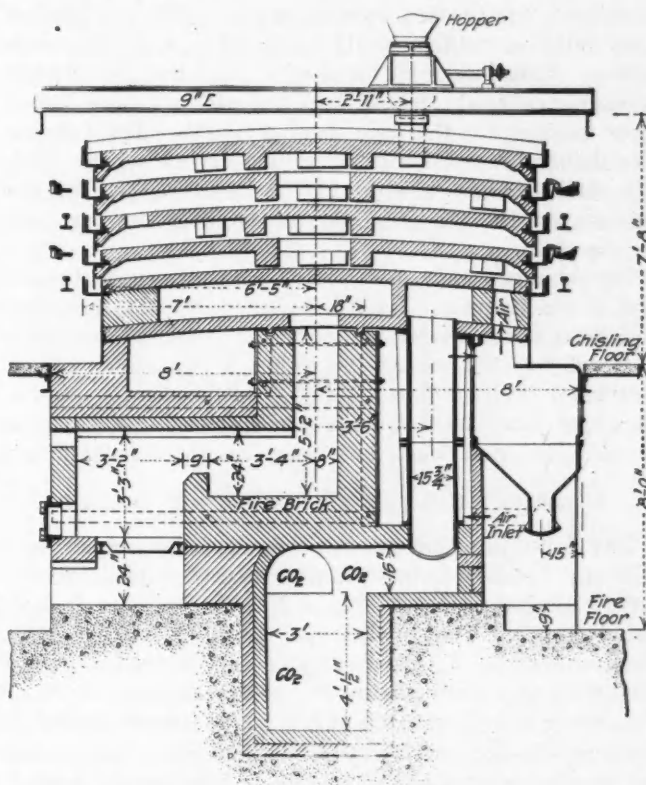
SECTION OF ONE OF THE FIRST SPIRLET ROASTING FURNACES ERECTED
